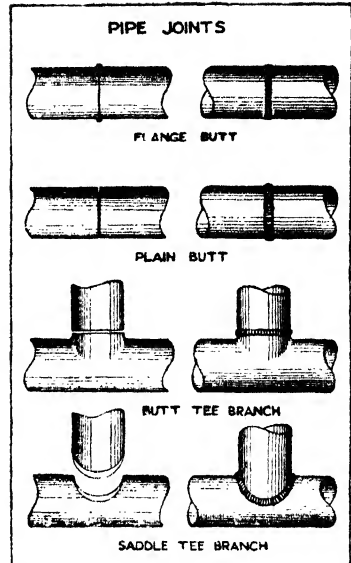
COPPER WELDED PIPE JOINTS
